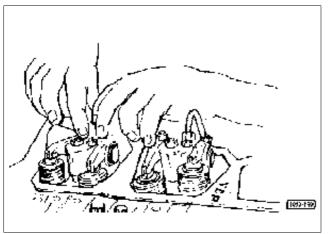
Fit gaskets between heads and caps. Orientation shall be provided according to "TOP" indication on them;
